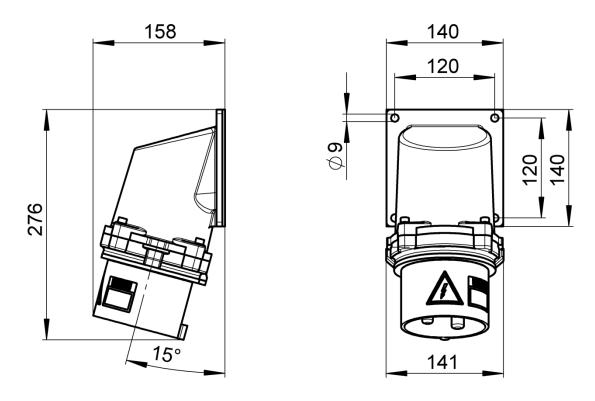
Dimensions Male Connector Panel (Angled) MCPA D-Line, C-Line (160A – 250 A) in mm
